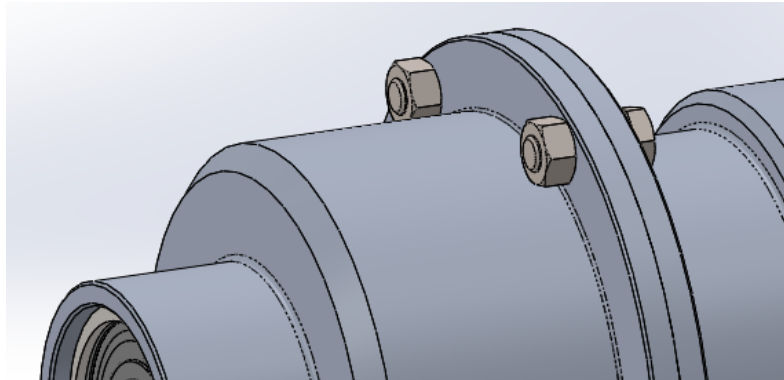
improved version of the case: single piece and flanged coupling with axial bolts
